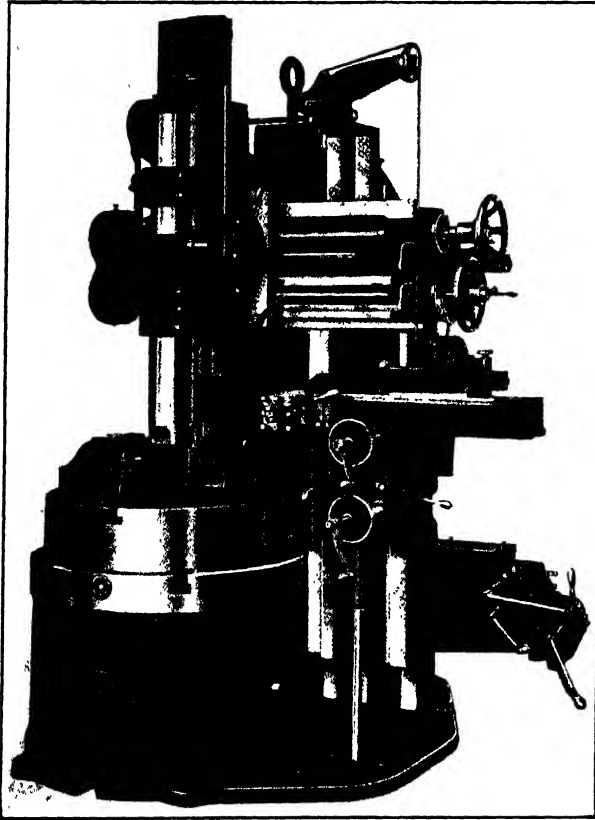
Bullard 42-inch, Spiral Drive, Vertical Turret Lathe for General Service.
